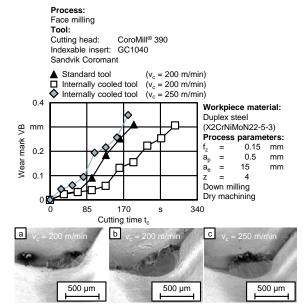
Wear behavior at different cutting speeds v_c (a) Internally cooled tool after t_c = 129 s; (b) Standard tool after t_c = 129 s; (c) Internally cooled tool after t_c = 155 s
